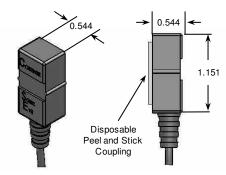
SL-630 series element with peel and stick disposable mounting tape. NOTES: Clean area on container before installing. Remove backing from tape and adhere to container. Press sensor to container firmly
